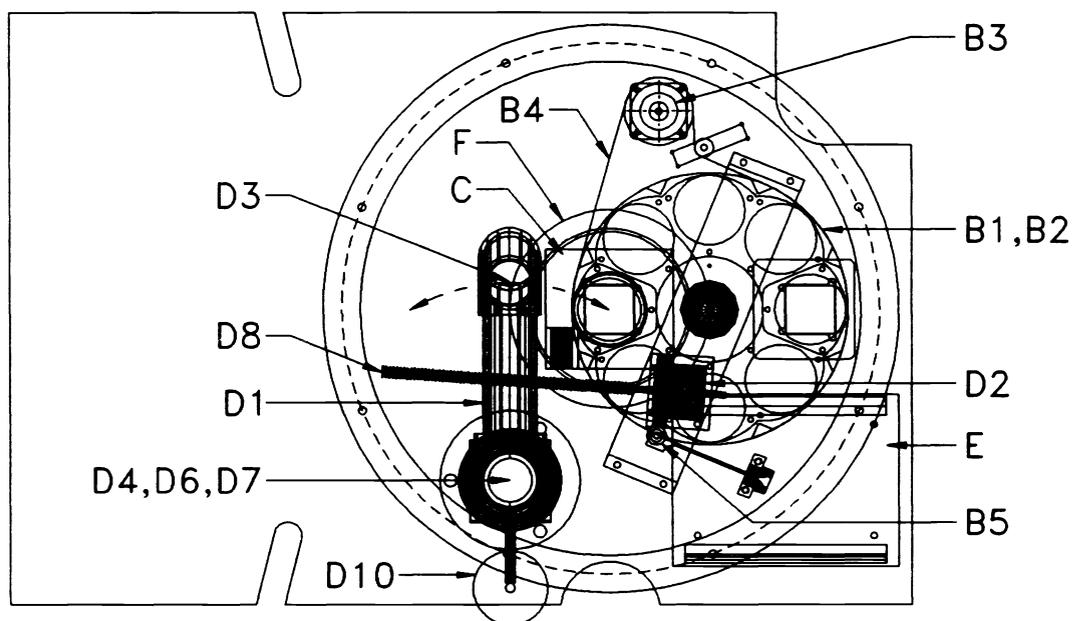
Top view of the f/9 instrument assembly, with the top dust cover removed.
